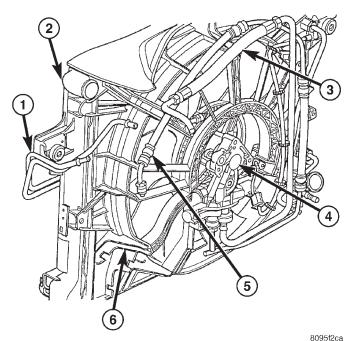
HYDRAULIC RADIATOR COOLING FAN AND
